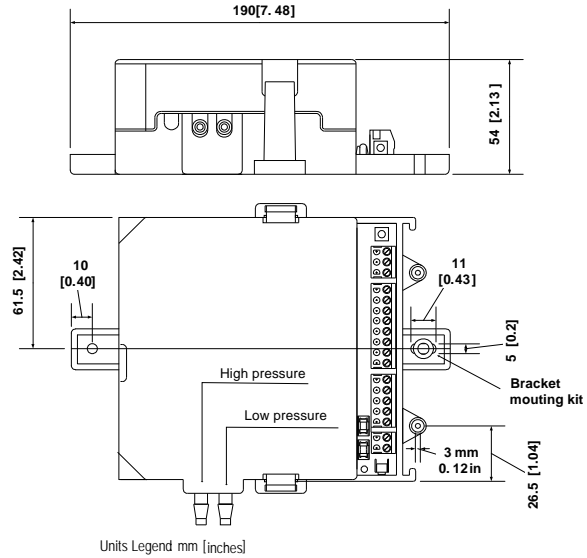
LN-VAVLN Controller Dimensions, mm (in.)
